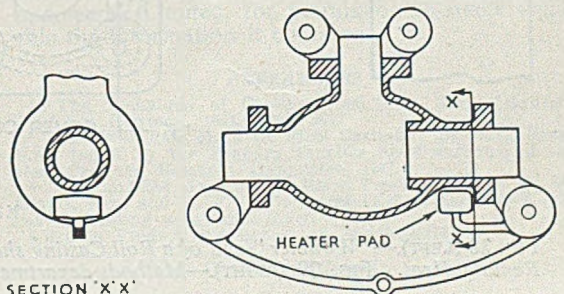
System of Heater Pads arranged for a Steel Valve Casting.
